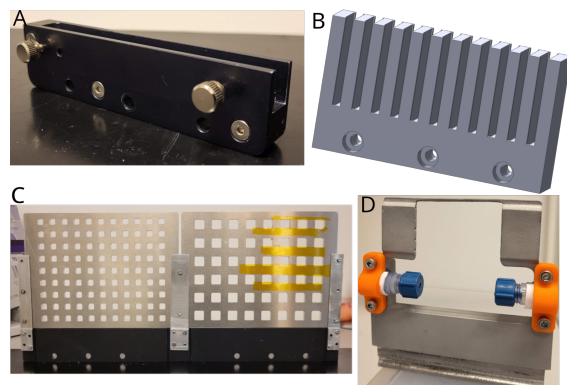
Examples of Sample holders mounted on the Z-translation stage: (A) Sliding base allowing quick and reproducible sample holder positioning. (B) 3D printed holder for cuvettes [9]. (C) Frames for multiple samples (solid and gels). (D) Aluminum holder created using PBF (Powder Bed Fusion) with space for a flow-through cell with quick connectors (bottom) and multiple disposable capillaries on the top [8].
